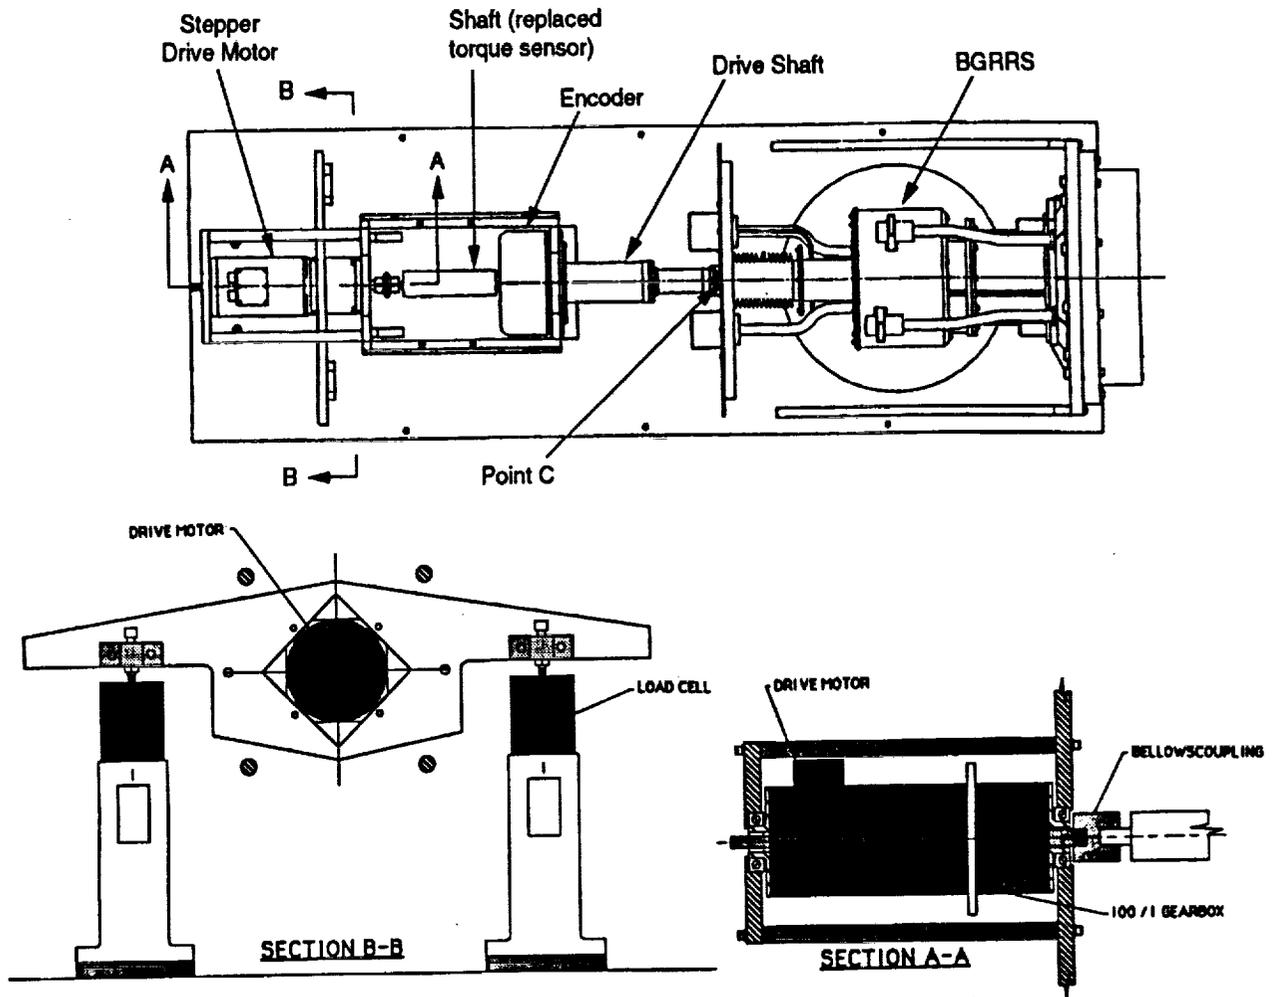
Typical Roll Ring Test Setup (BGRRS)
